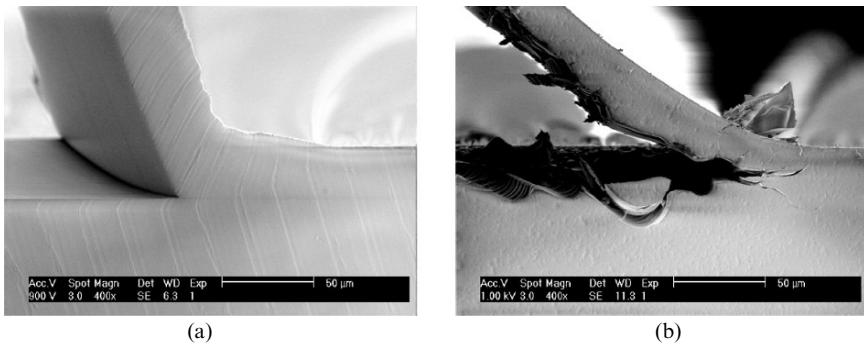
(a) Continuous chip formation in machining thermoplastic polycarbonate, (b) discontinuous chip formation in machining thermosetting allyl diglycol carbonate at cutting speed of 2.5 mm/s. Courtesy of Dr. Guido Gubbels [7]
